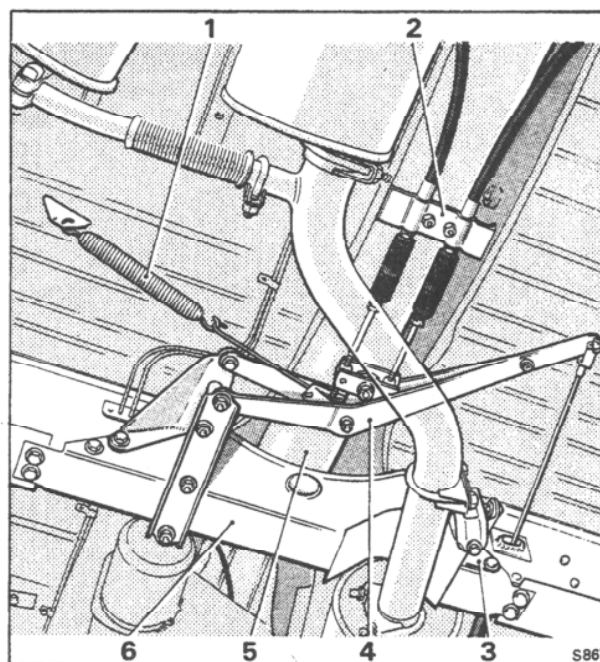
Parking brake intermediate linkage (Right-hand drive cars)
